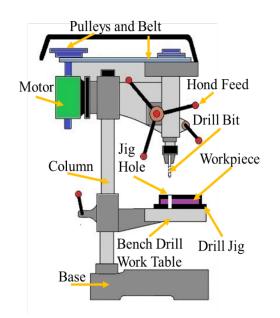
Drilling Jig on bench drill (Schematic Illustration).
